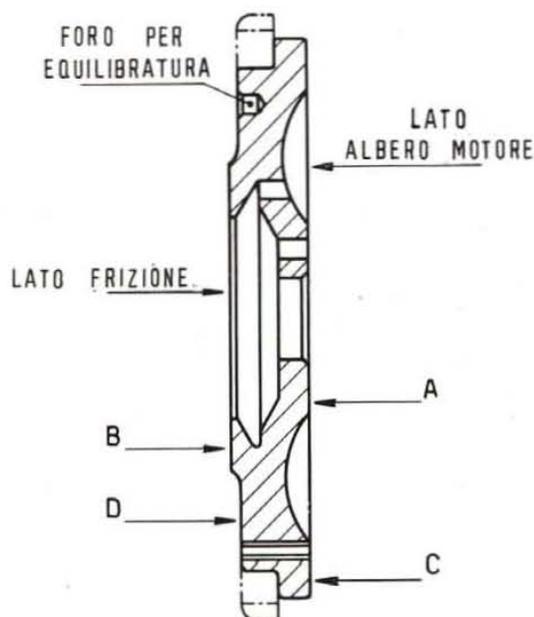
Diagram for checking flywheel mating faces to driven plate and crankshaft mounting flange.
